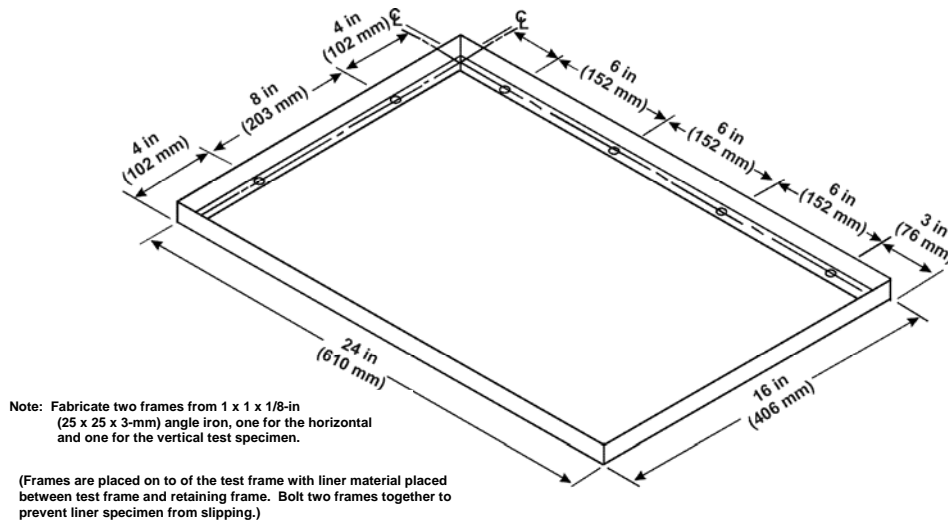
Cargo Liner Test Specimen Retaining Frame
